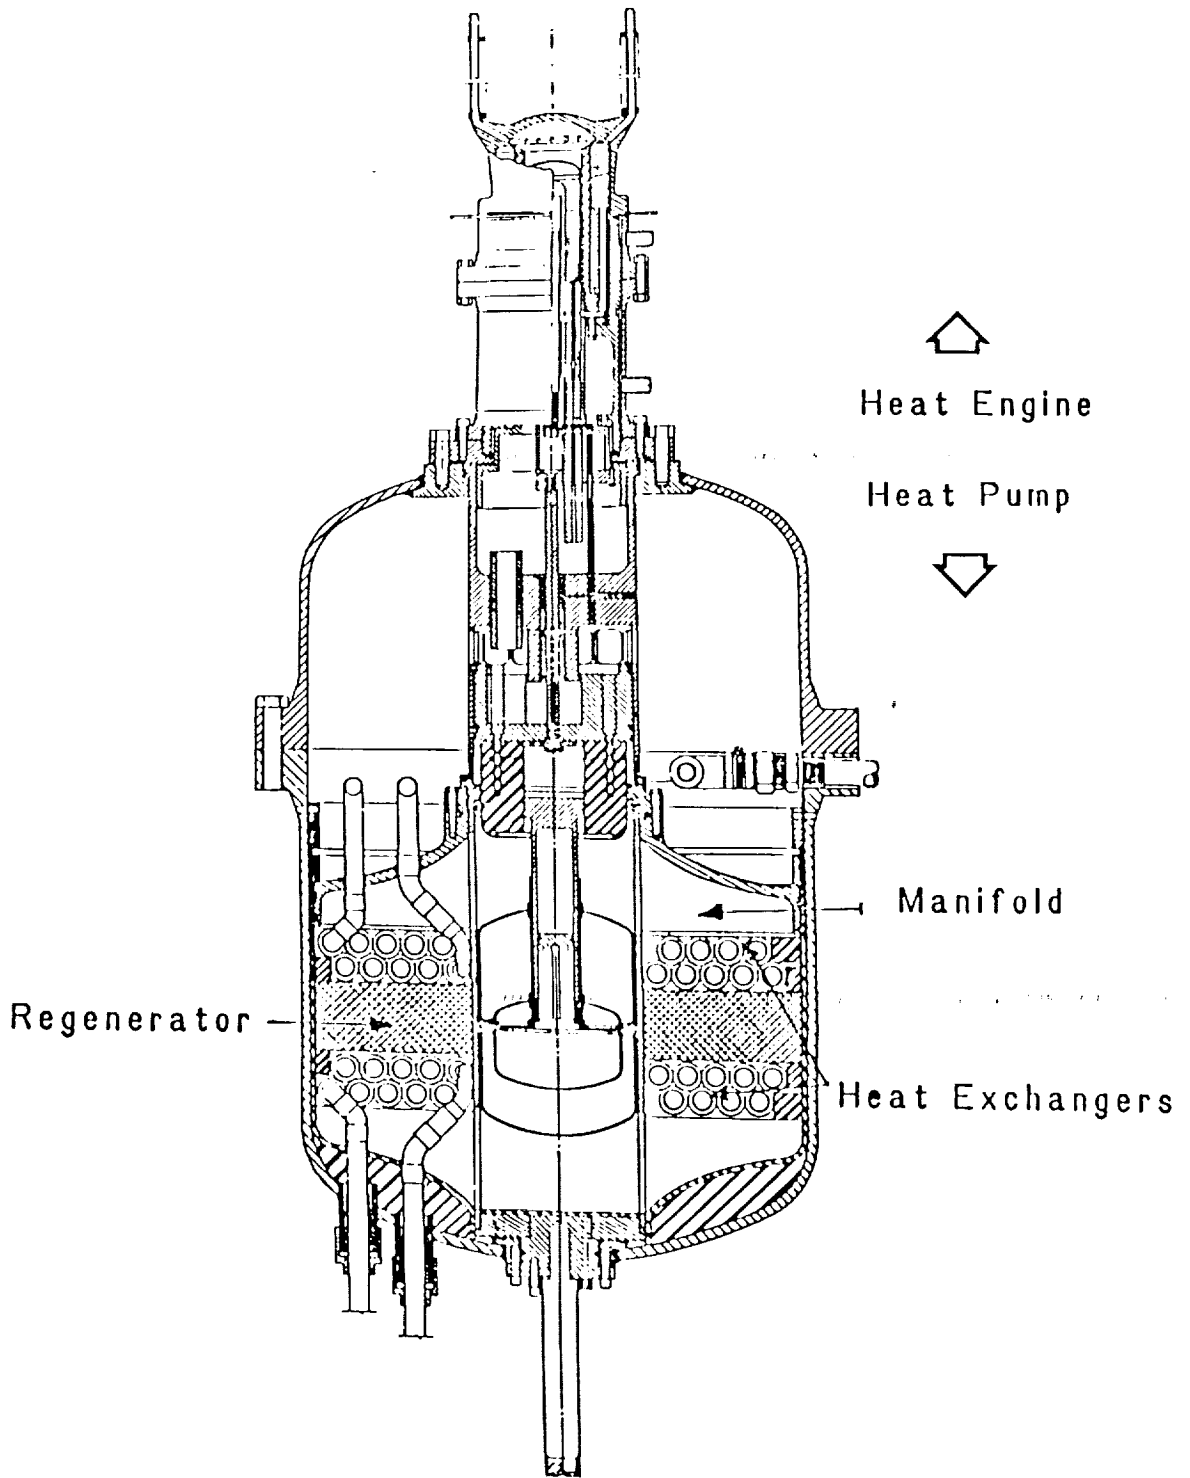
DUPLEX HEAT PUMP ASSEMBLY
